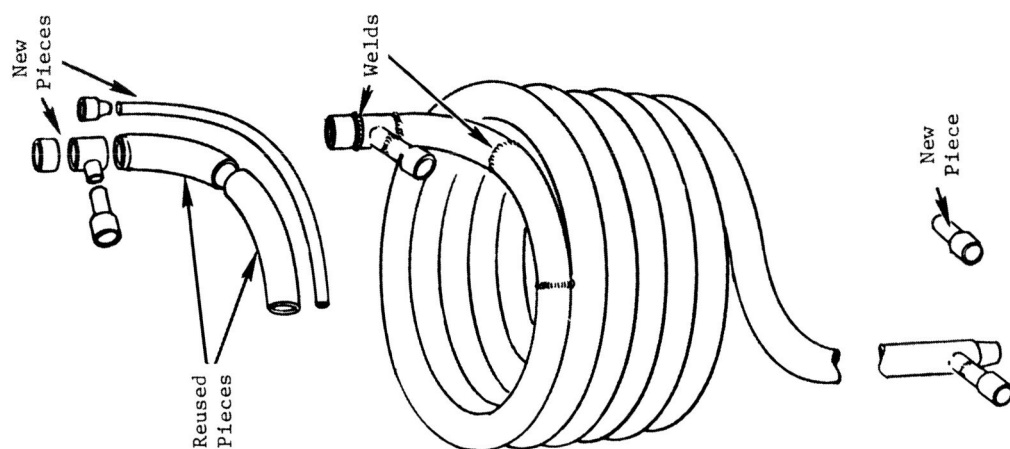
Top of T-111 corrosion loop boiler following final repair welding.
